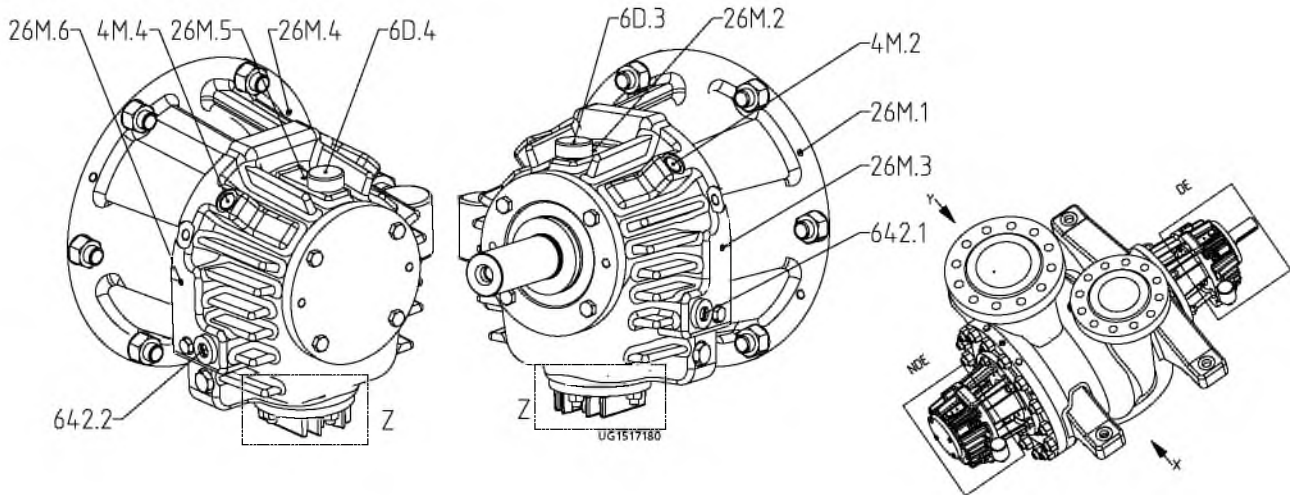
Bearing bracket connections - version with oil ring lubrication, view Y
